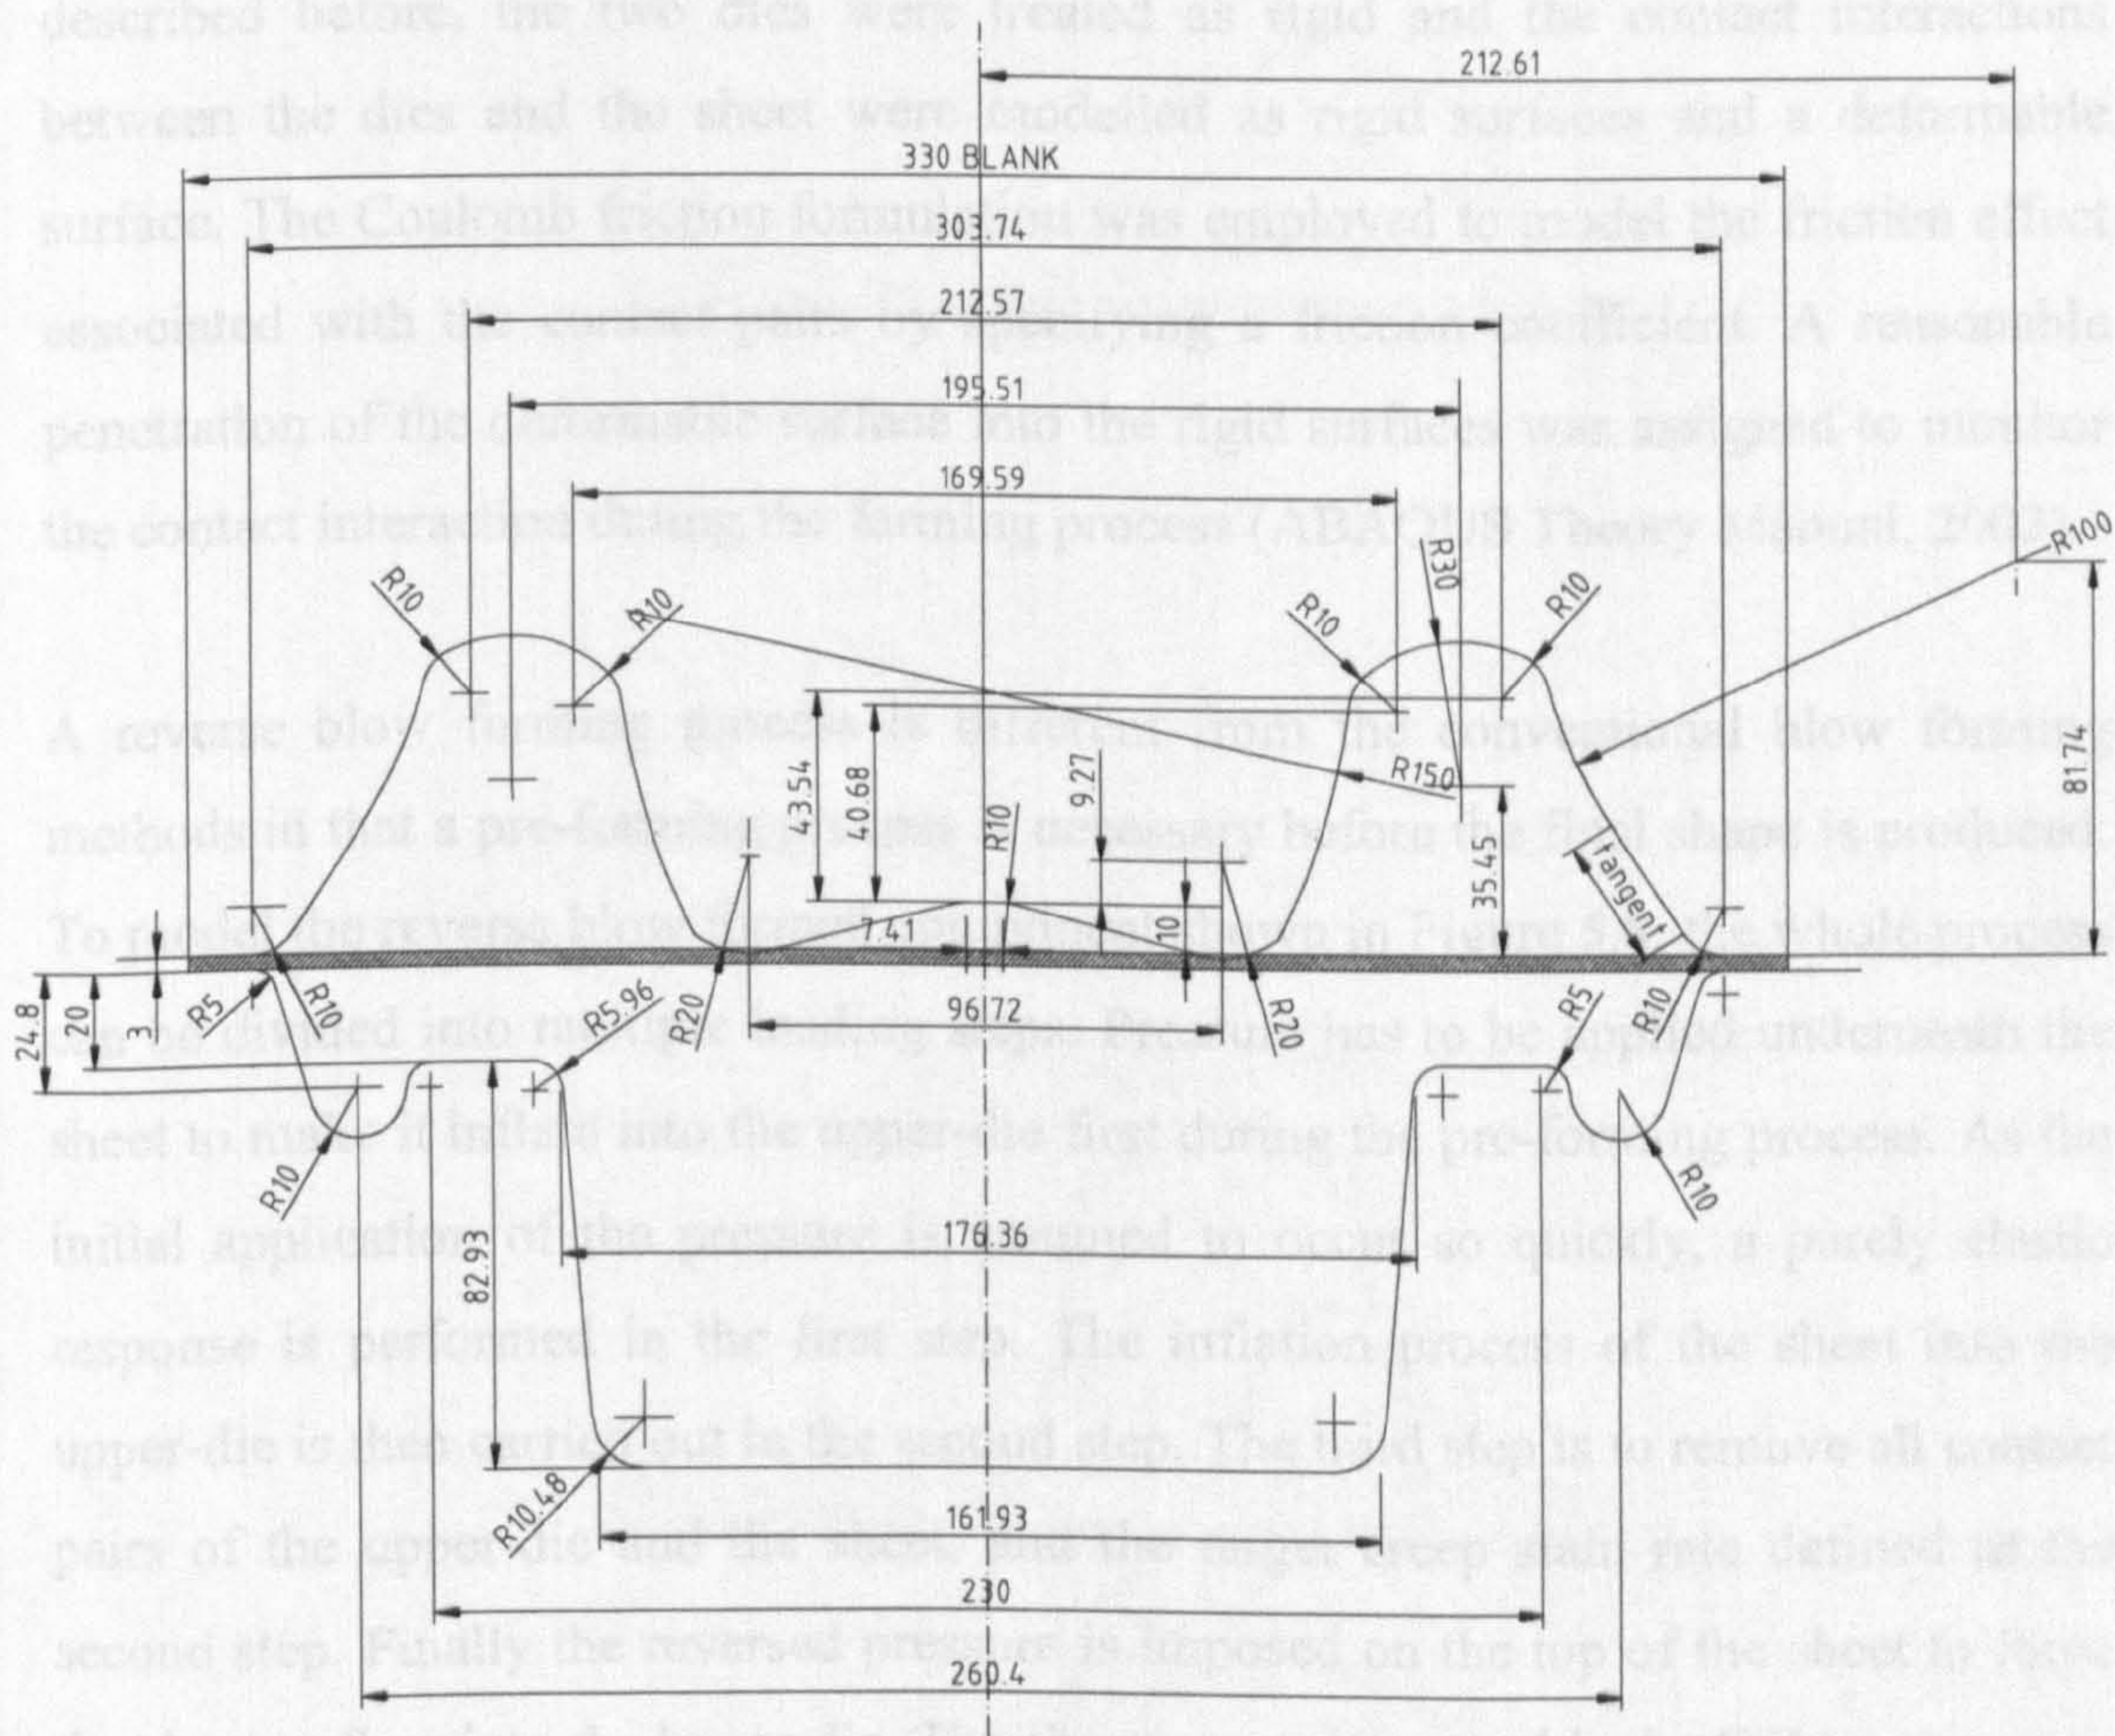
Geometry of the reverse forming tool for a complex component (unit: mm)
